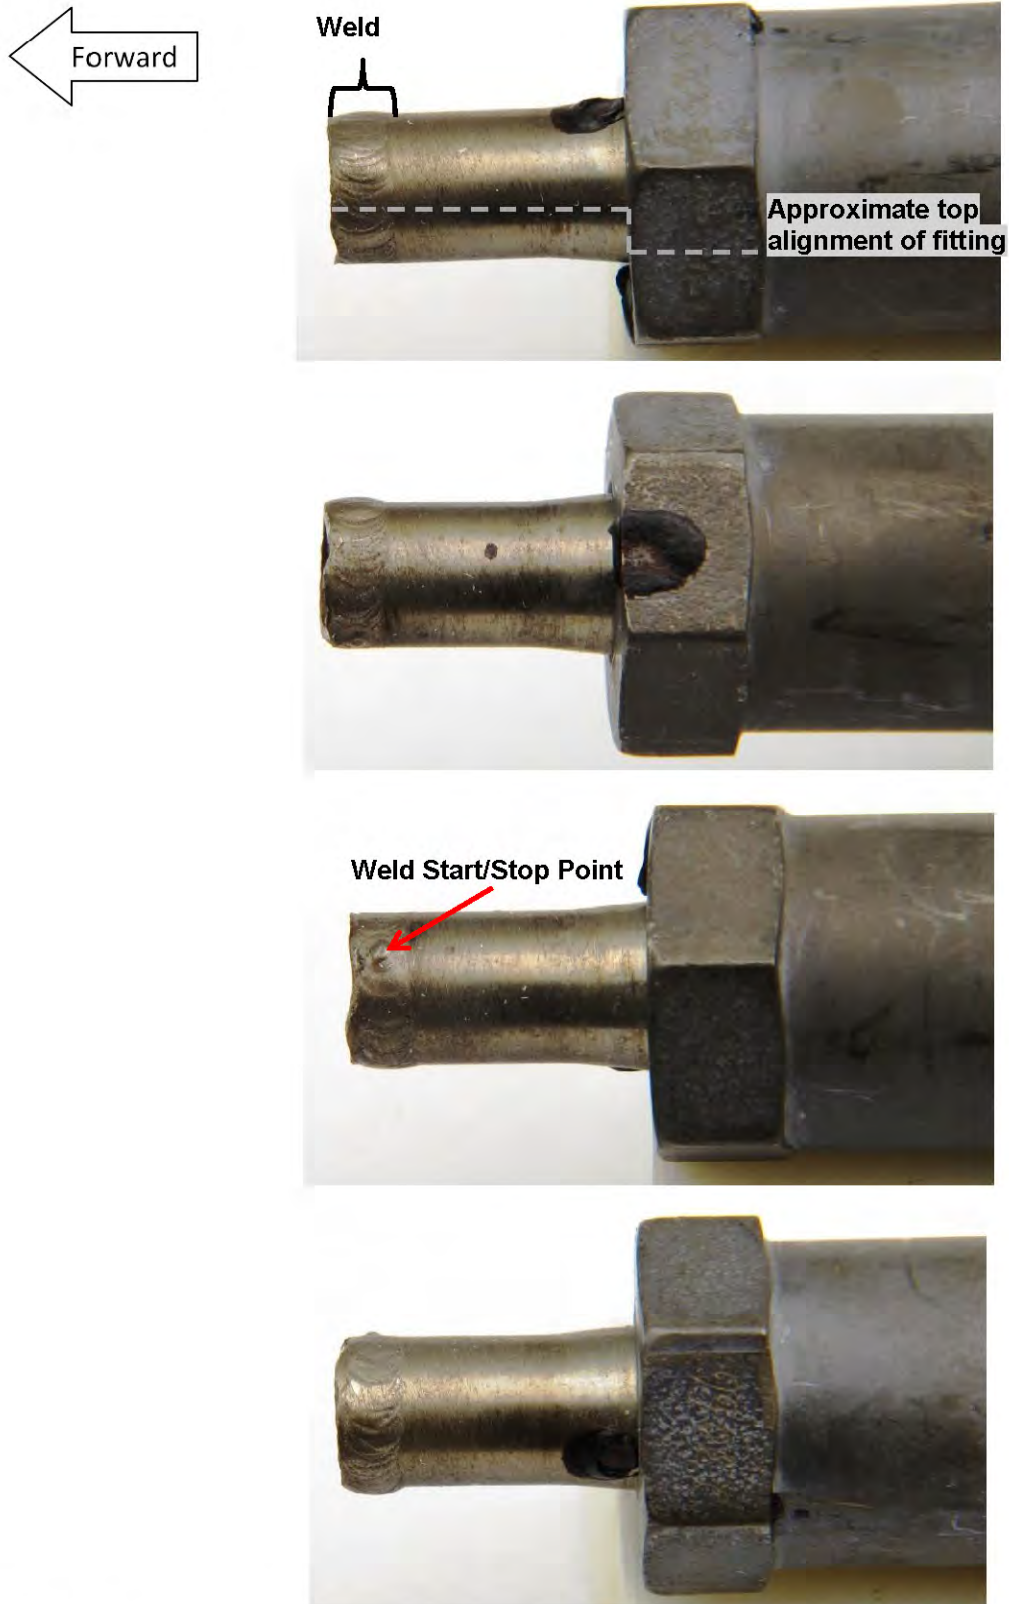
90° rotated detailed views showing the weld and fitting side of the fractured tube. The fracture was at the toe of the weld on the side opposite the fitting. The tube was rotated 90° counterclockwise, forward looking aft, for this succession of images.
